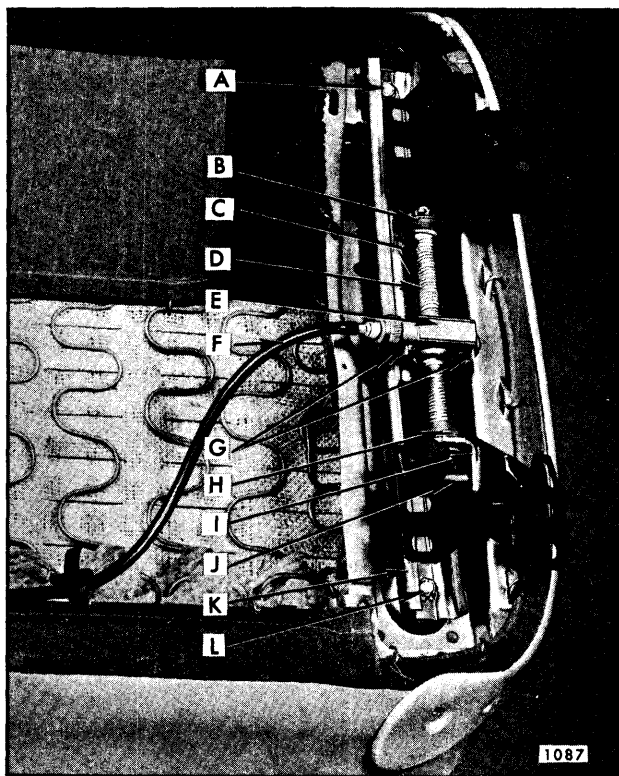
Horizontal Power Adjuster - "C & E" Styles
